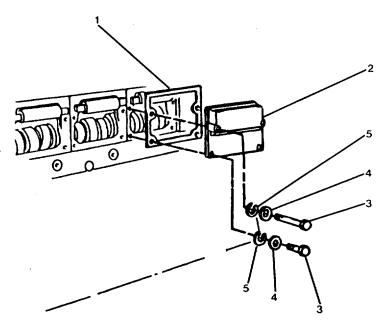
Cam Follower Cover Removal/Installation.
